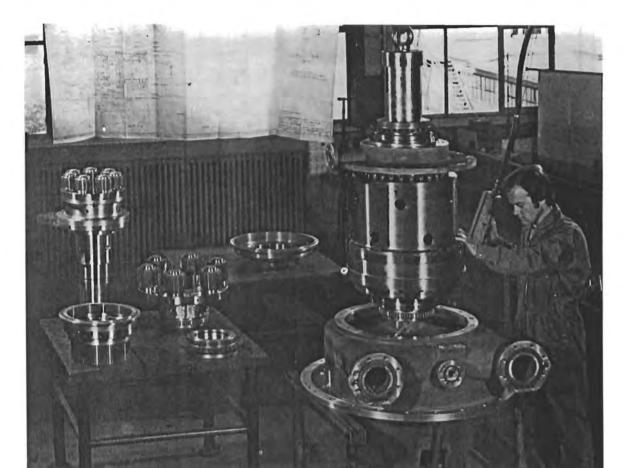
Splitter planetary gearbox gas turbine - compressor - generator 4050 kW, 12,020/17,412/1500 rpm.
